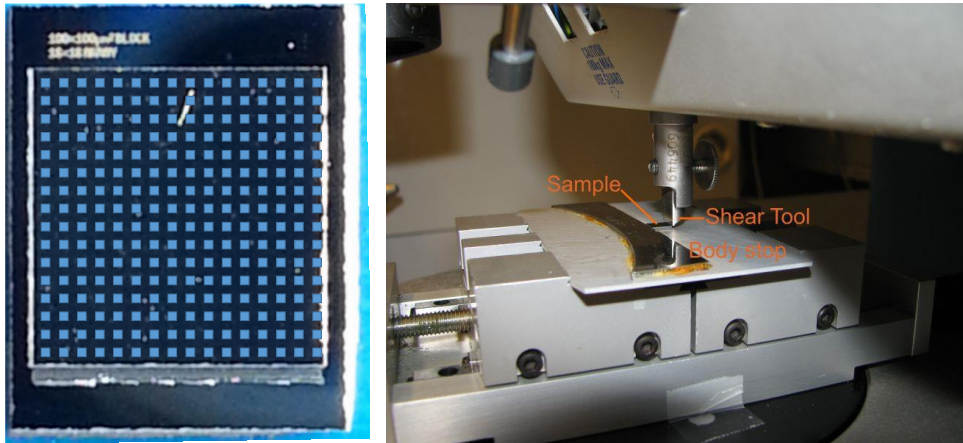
A bonded die with a 16×16 array (blue squares) of a bond solder (*left*), which is schematically drawn on the top wafer. Shear test die (sample) holder (*right*).
